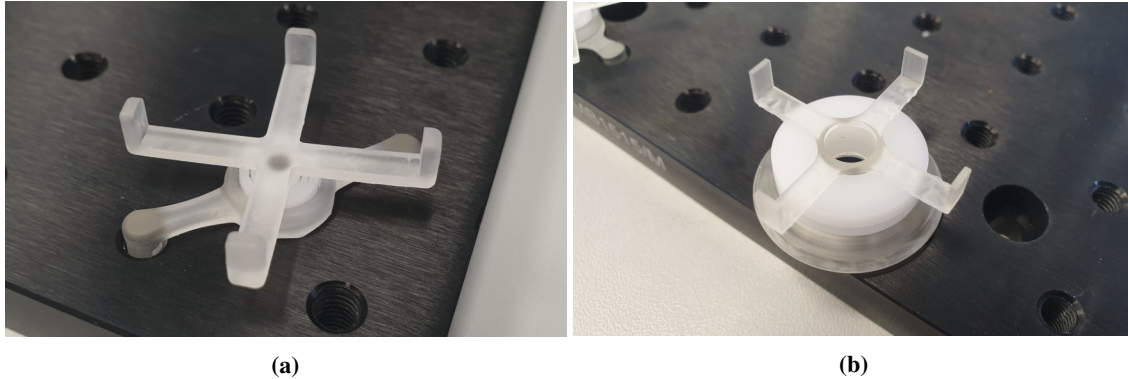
3D One-axis Printed Ball Bearing Platforms
